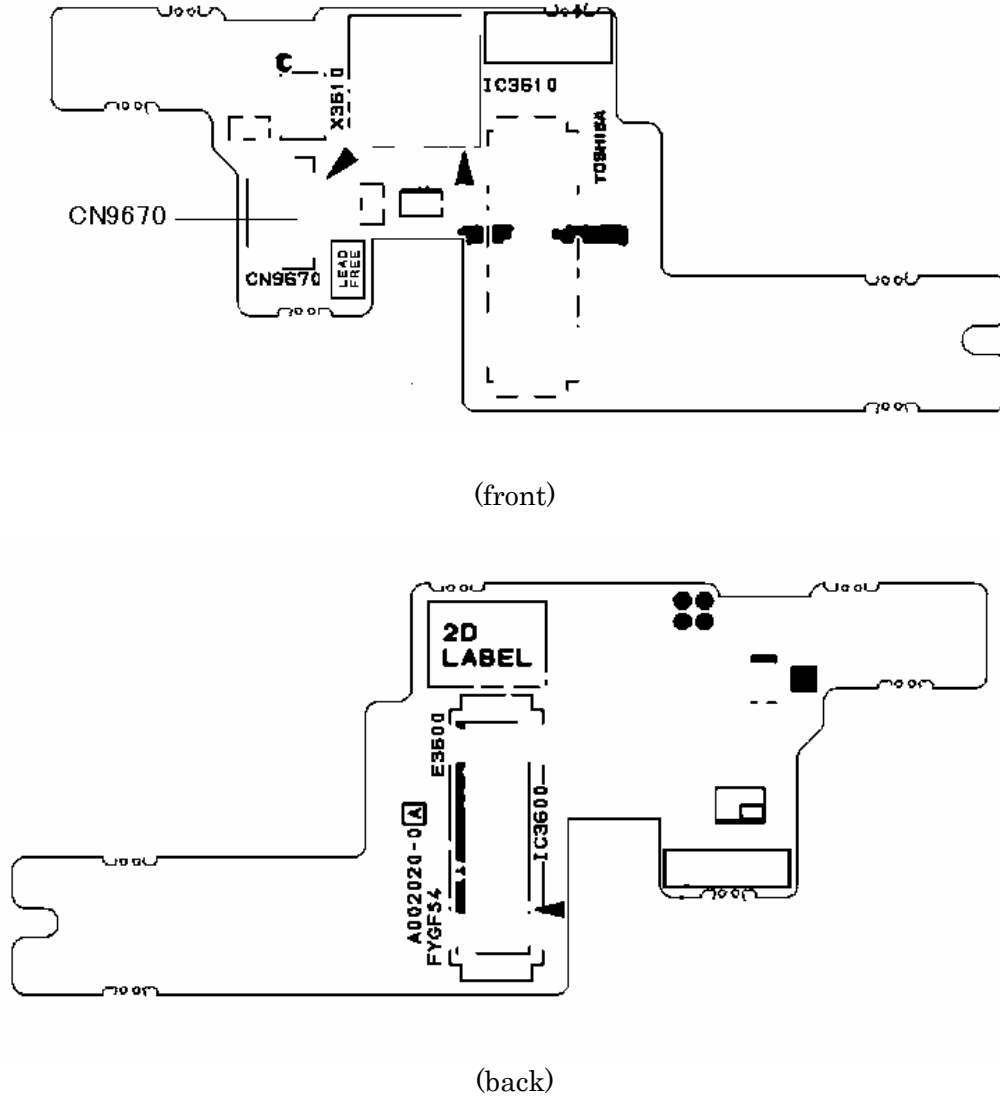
Fingerprint Sensor board (FYGFS*) layout (front/back)
